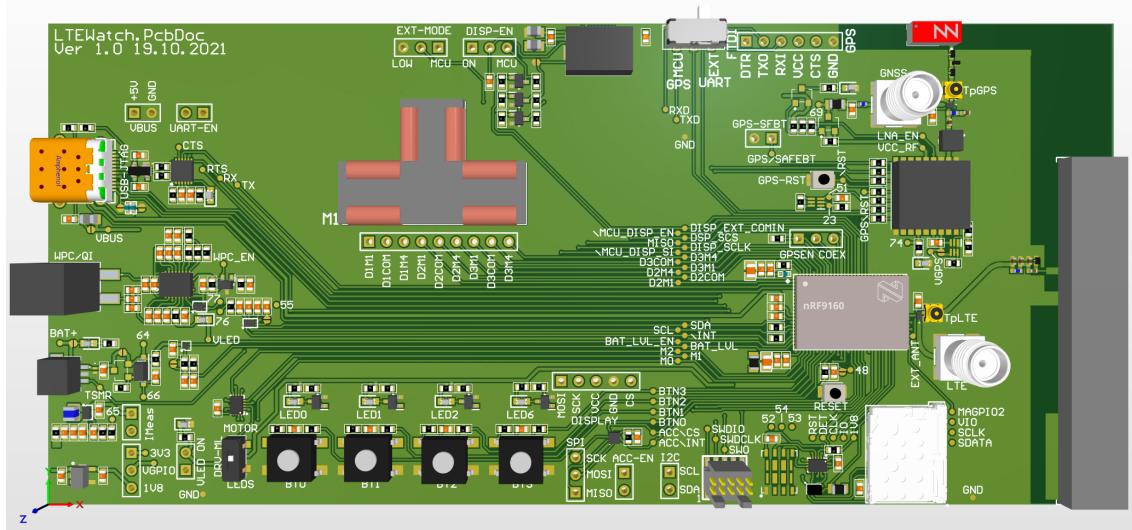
Prototype PCB of the *LTEWatch
